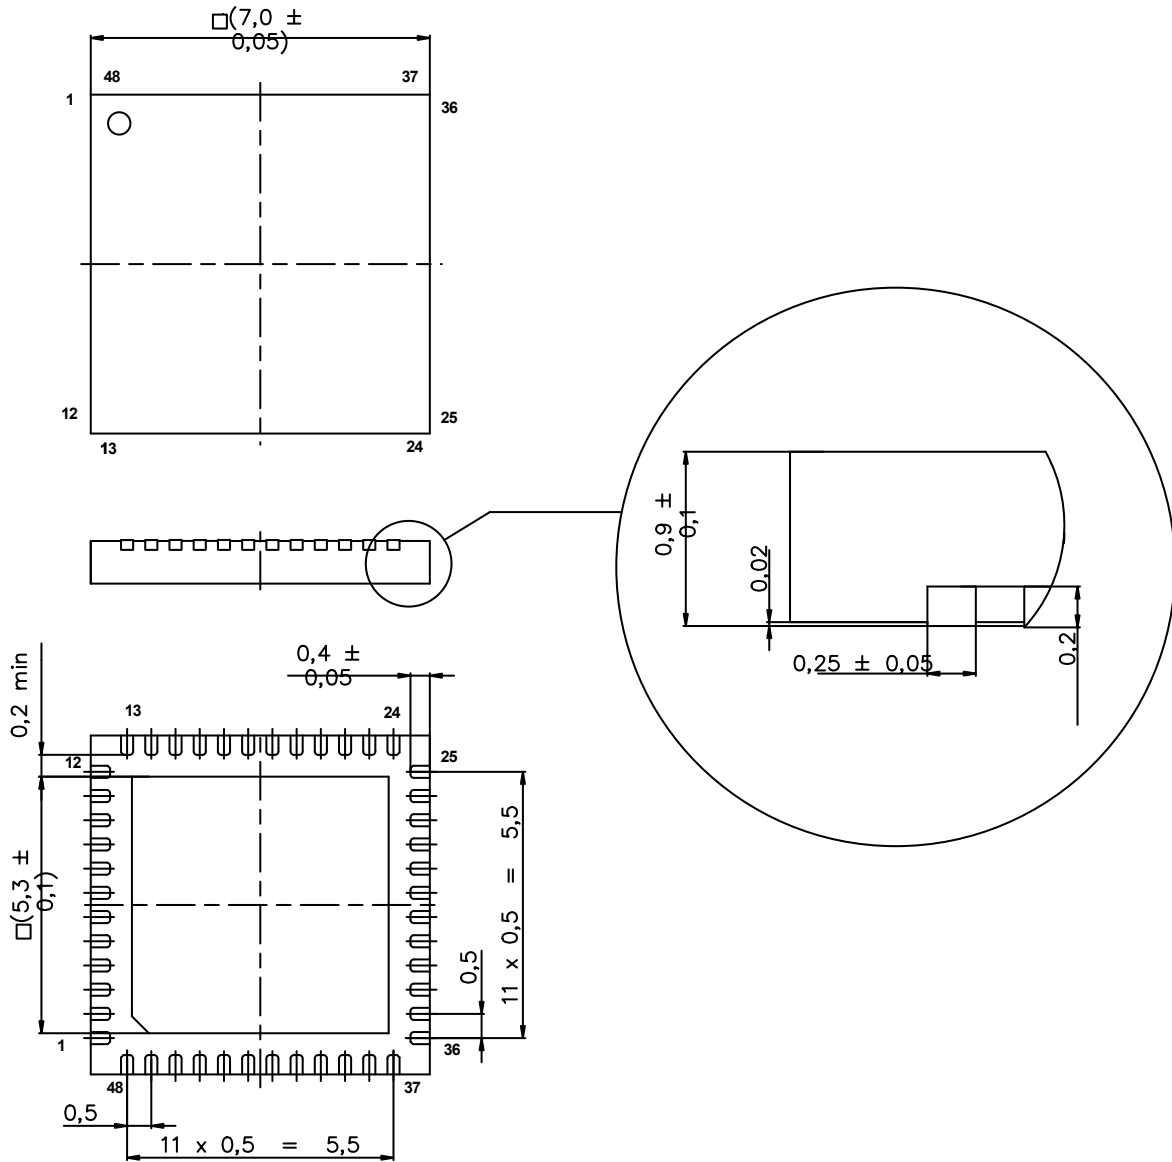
48-Pins Quad-Flat No-leads (VQFN48L) Package with an Exposed Pad and 7 mm x 7 mm Body. Dimensions shown in millimeters
